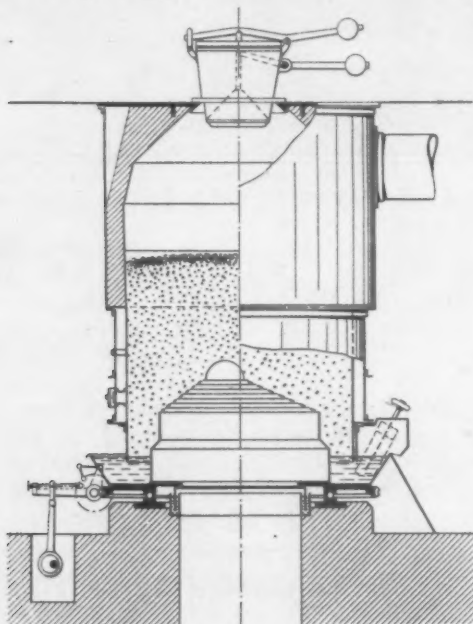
Kerpely Gas Producer with Rotating Grate.
